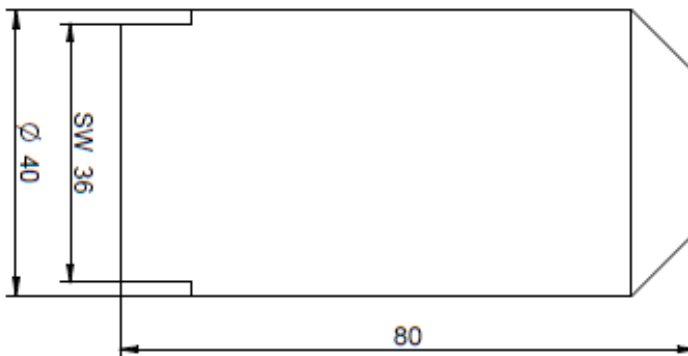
Dimensions (in mm) of the LDP MC measurement chamber base body.
